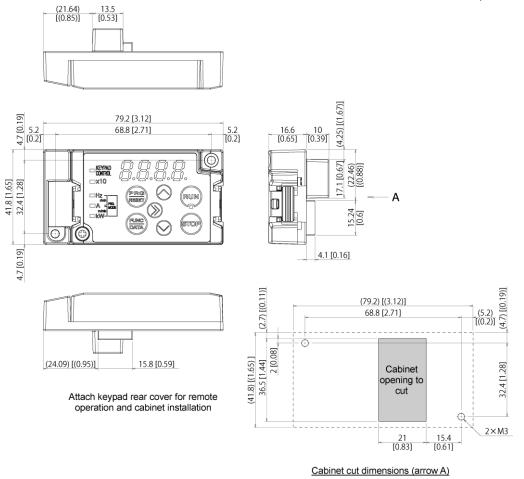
Fixing Screw Positions and the Dimensions of the Cabinet to Cut
